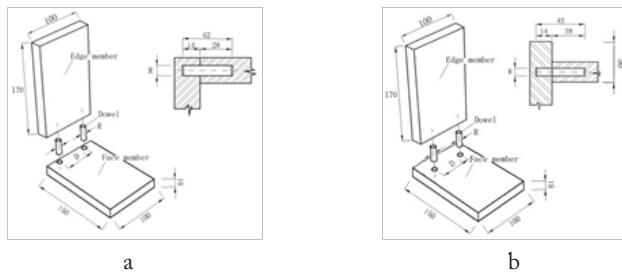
Specimen schemes for bending strength of L-shaped (a) and T-shaped (b) joints.
